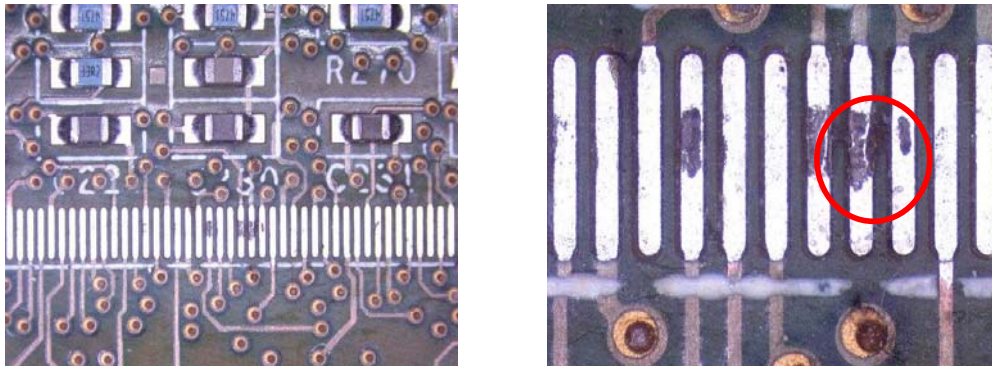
shows QFP defective solder joint assembled with ENIG PWB surface finish.
